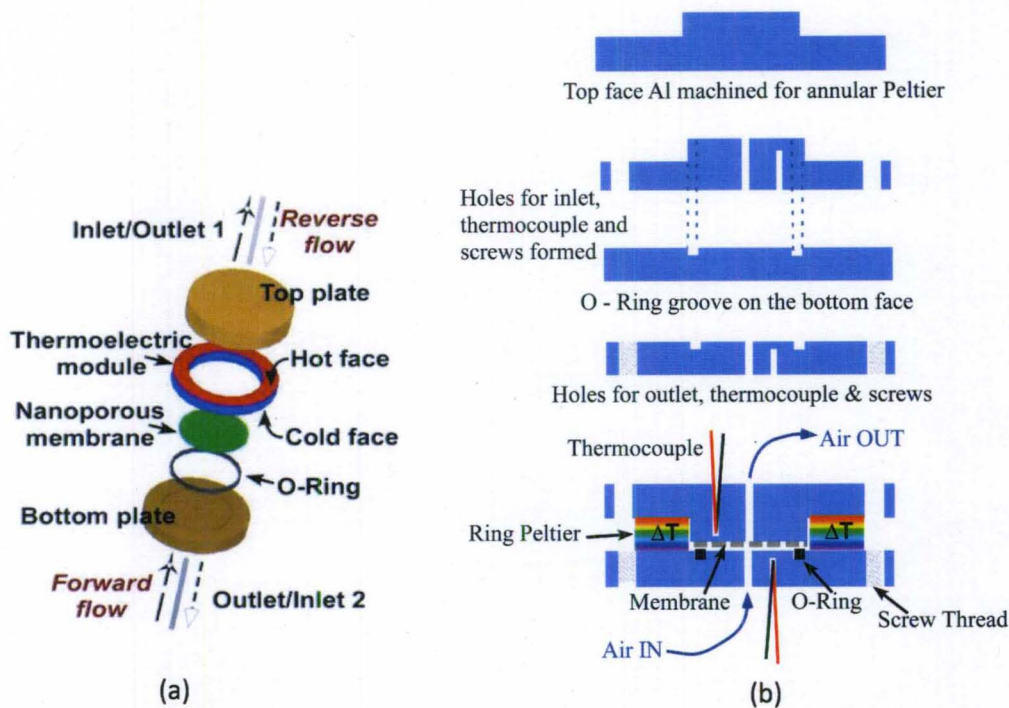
(a) Exploded view of the bidirectional Knudsen pump using the radial design, and (b) manufacturing steps of (a).
